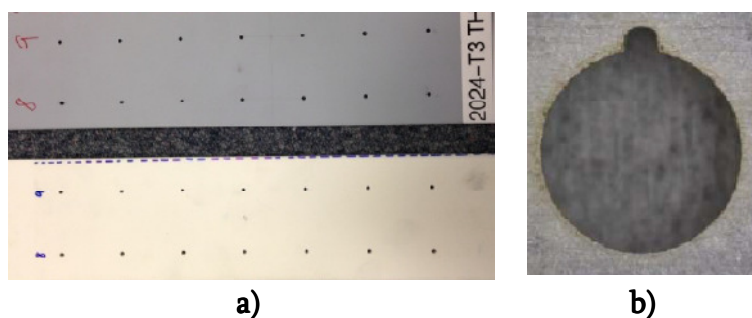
Painted aluminium panels with holes and EDM notches machined prior to fatigue testing: a) top – 2024-T3 aluminium thin panel, bottom – 7075-T6 aluminium thick panel; and b) close up of a hole (1/8" in diameter) and EDM notch.
